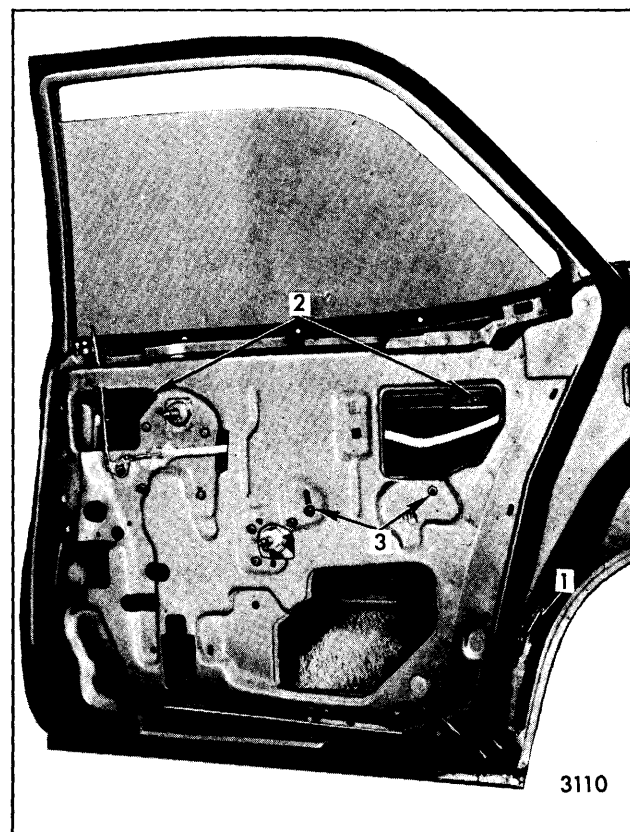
Rear Door Window Removal and Adjustments - "B" Closed Styles
